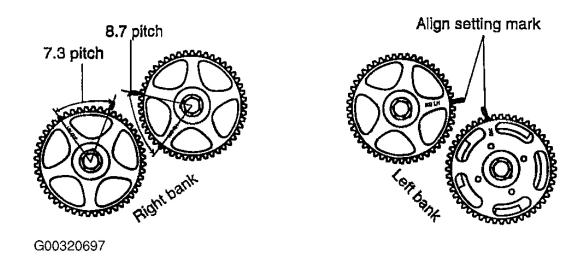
Installing & Aligning Camshaft Sprockets Courtesy of KIA MOTORS AMERICA, INC.
